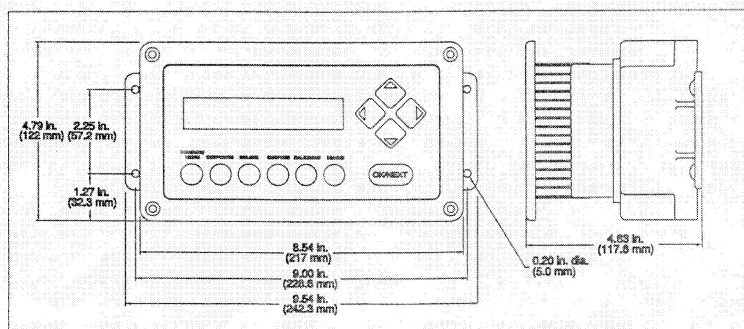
Wall Mounting Dimensions (with accessory rear cover installed)
